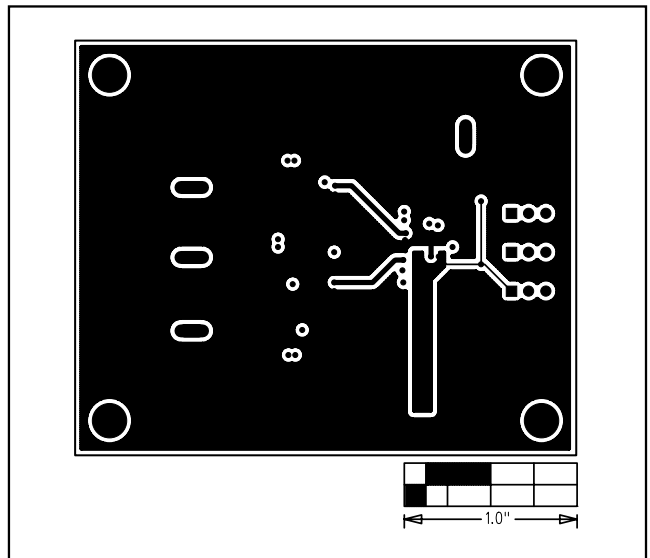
MAX5066 EV Kit PC Board Layout—Internal Layer 3—PGND Plane
